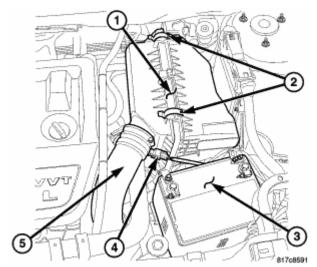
AIR CLEANER HOUSING Courtesy of CHRYSLER LLC
